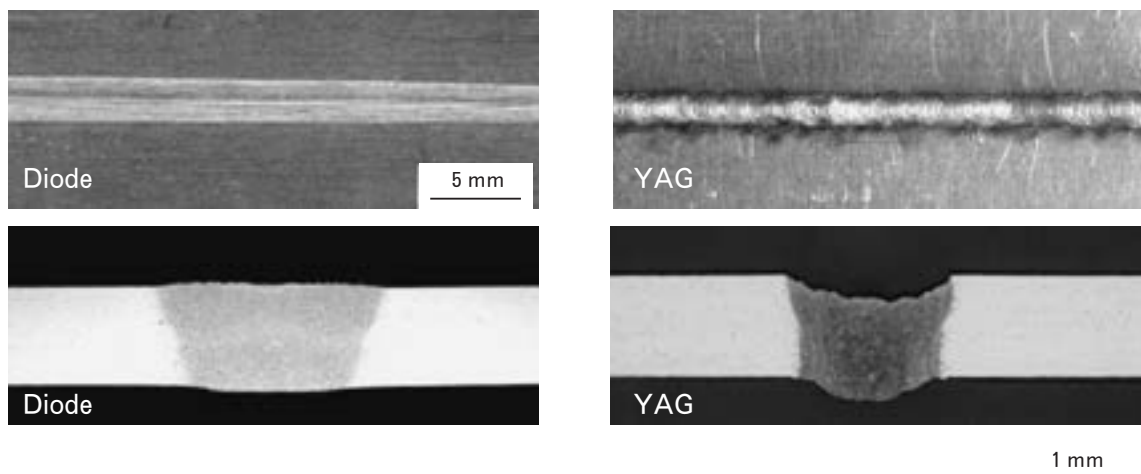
Top bead outlooks and cross-sectional views of laser welding (AA5022)^{12,13)}.
